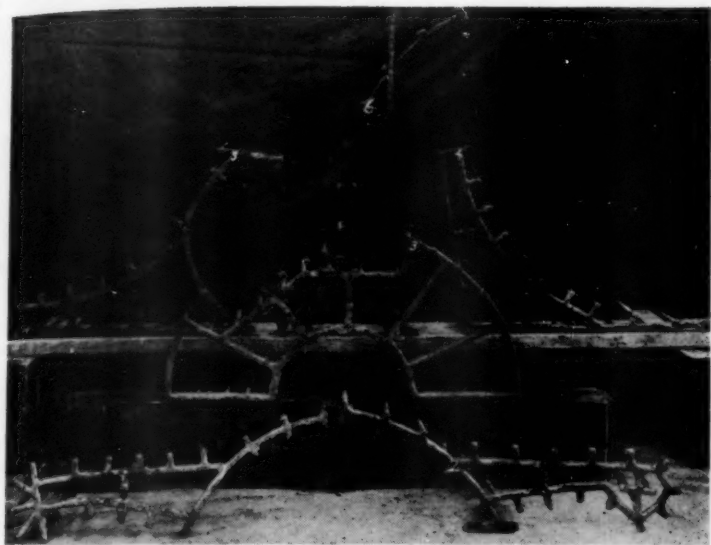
SHOWING ARBORS FOR TURBINE CASING CORES.
